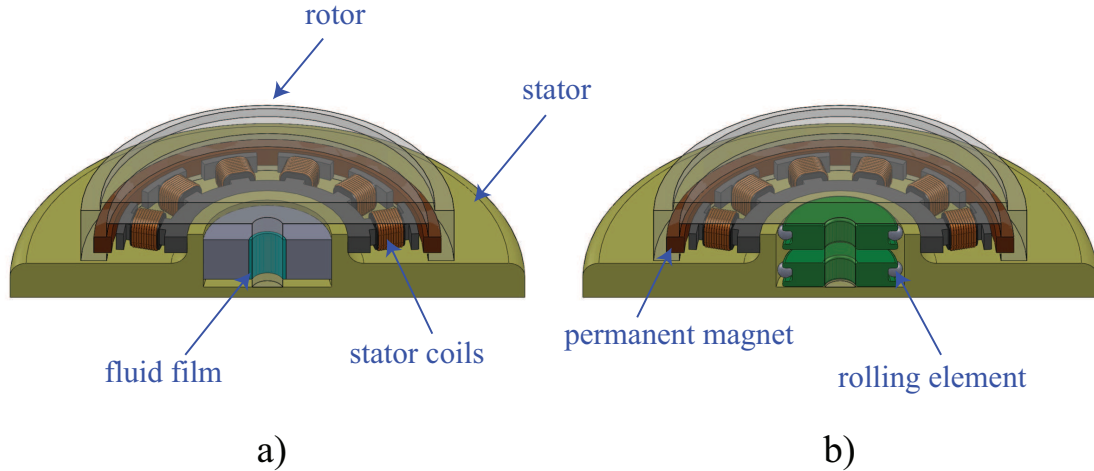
Schematic cross section view of a) fluid dynamic bearing and b) ball bearing in a spindle motor. The rotor is shown semi-transparent for clarity.
